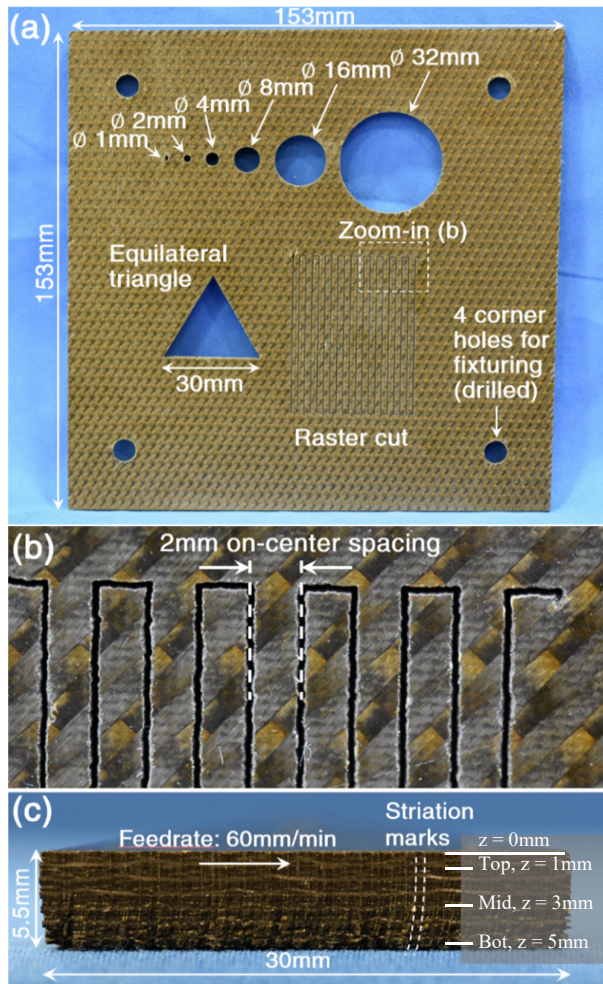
(a) Top view of various shapes cut in a CFRP sheet with WDM, (b) zoom-in view of raster kerf, and (c) side view of bottom-edge of triangle.
